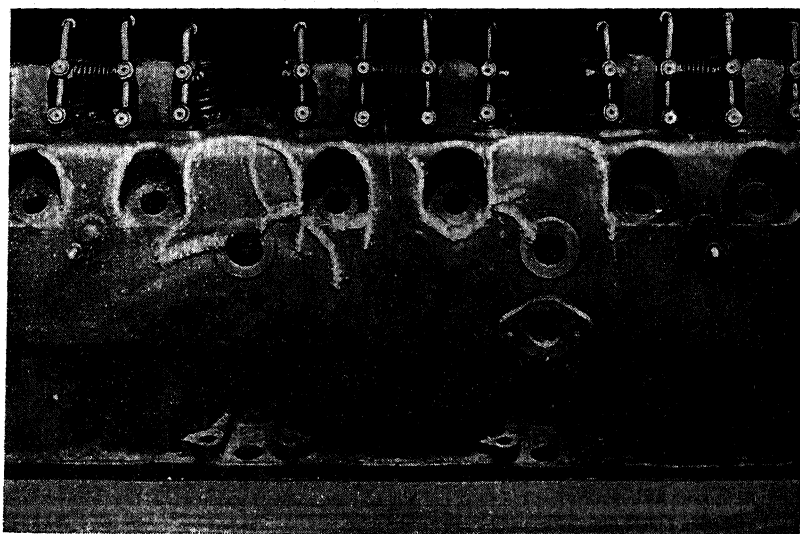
A cracked engine block repaired with shielded arc electrode using cast iron procedure given on Pages 326 to 333.
